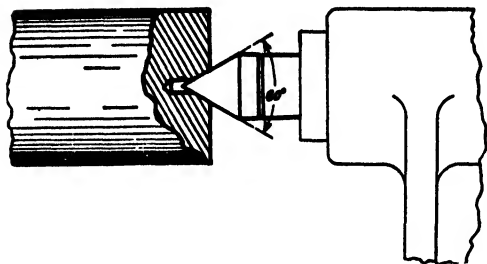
A correctly drilled and countersunk hole fits the lathe center perfectly. (South Bend Lathe Works)
